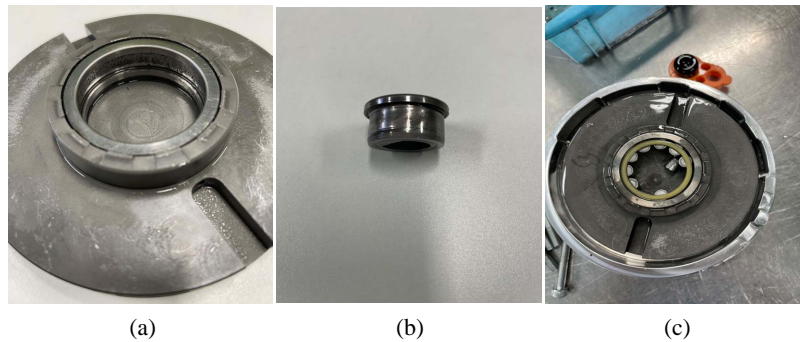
Bearing outer ring, inner ring, roller fatigue damage
